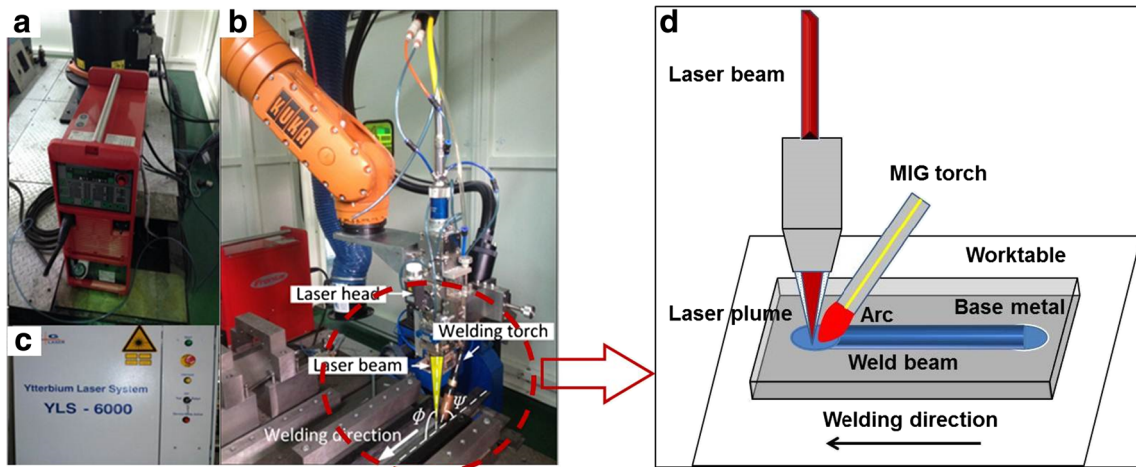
The experimental setup. a TPS-5000 FRONIUS welding machine. b YLS-6000 fiber laser. c Kuka (KR30H) welding robot d Schematic drawing of laser–MIG hybrid welding
